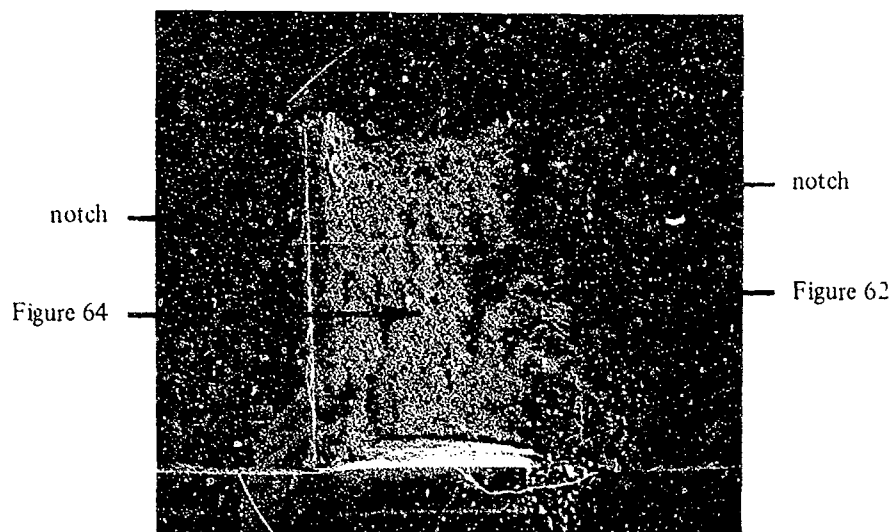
Fracture surface of temper-embrittled T-1 plate fatigue specimen, 10x.
